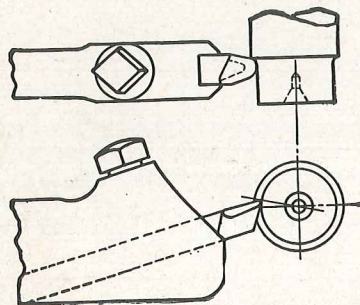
A.—A cutting tool ground for machining mild steel. The angles of back rake and side rake are quite pronounced, also the angle of front clearance and side clearance. Angle of keenness is approximately 60° .
